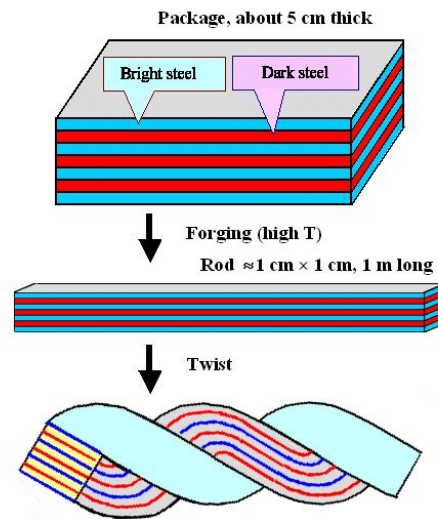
Pattern Welding Layering and Twisting of Metal [98].
